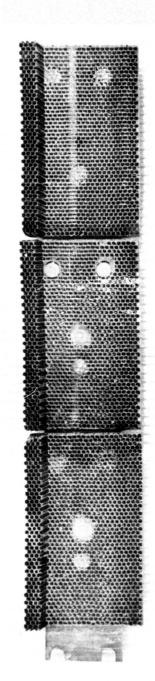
BUCKET SHROUD RUB IN HONEYCOMB SEAL
